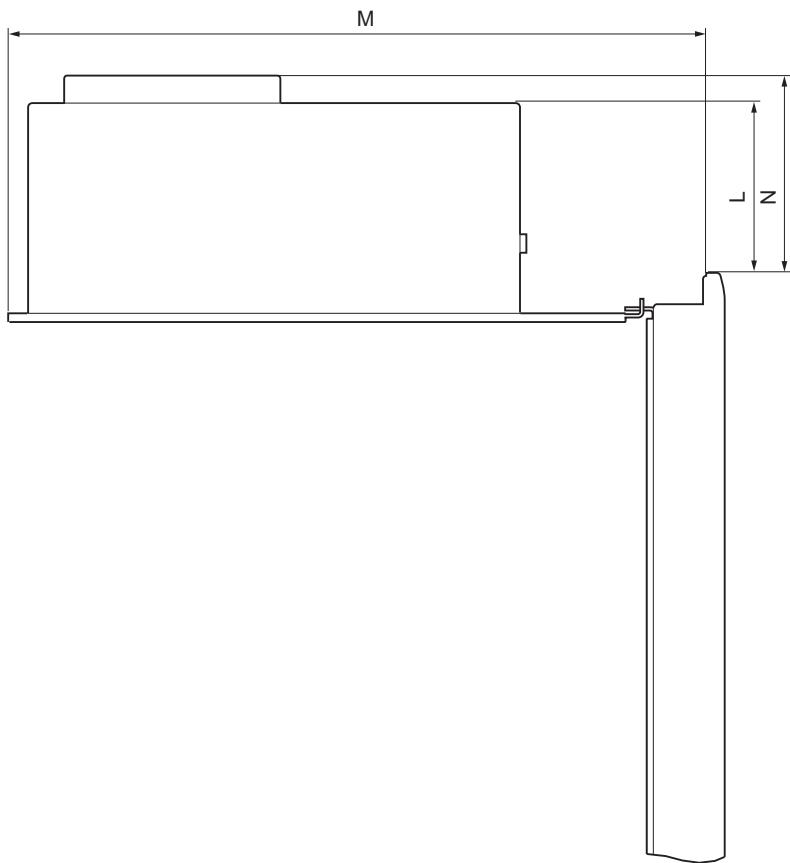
Panel PC 877 dimension drawing, computer unit swung away from control unit
